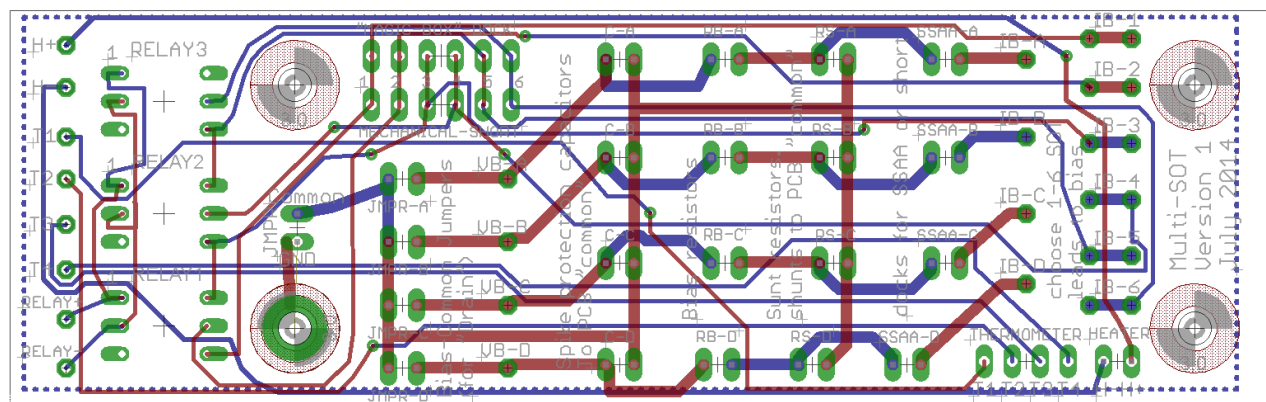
The PCB layout showing top copper layer (red), bottom copper layer (blue), pads and plated through (via) holes (green), silkscreen (gray) and the four mounting drills (dotted red/gray).
